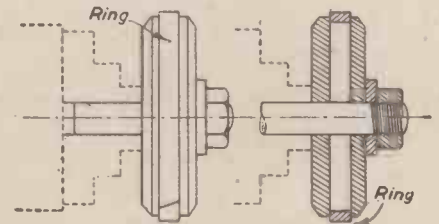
The ring closed and chucked on an improvised mandrel.
